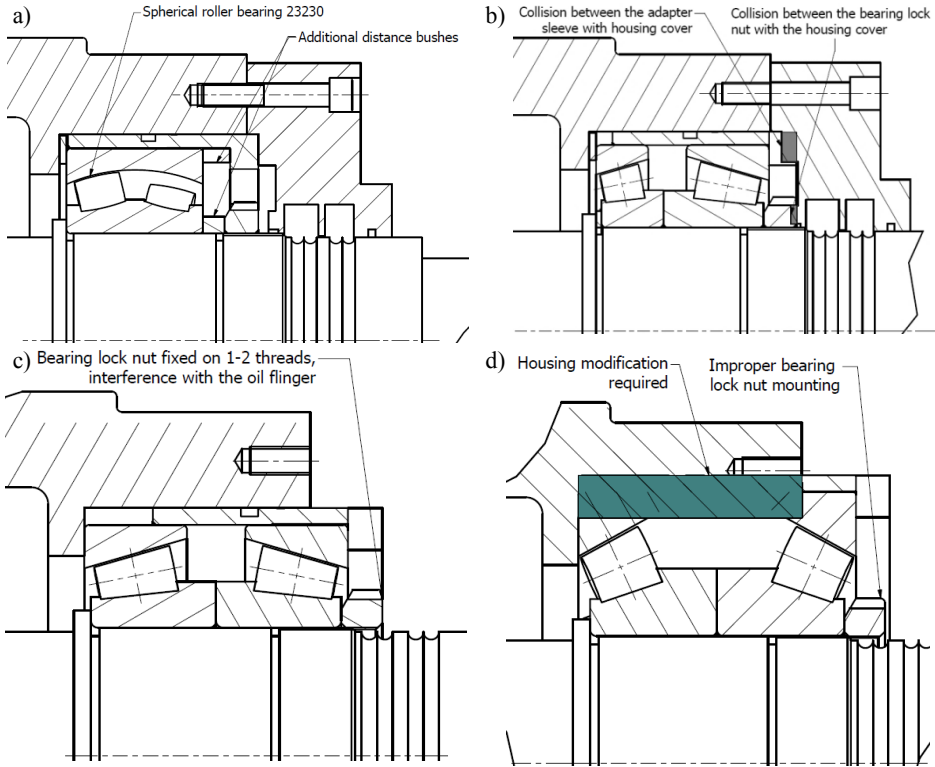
a) Spherical roller bearing 23230 – version A, b) Taper roller bearing pair 32230-A, 30230-A, X arrangement – version B, c) Taper roller bearing set 2x 32230-A, X arrangement – version C, d) Taper roller bearing set 2x 31330-A – version E
